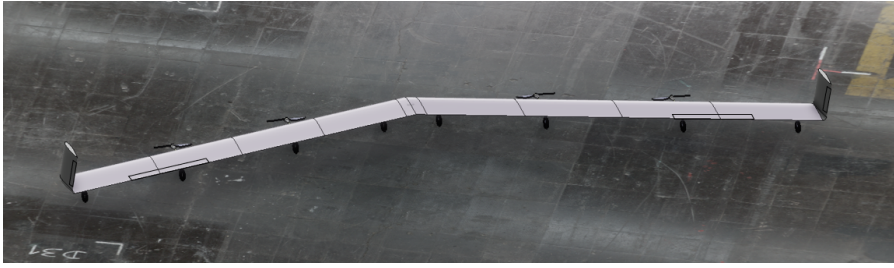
Assembly representation with assembly jack removed and added propellers.
